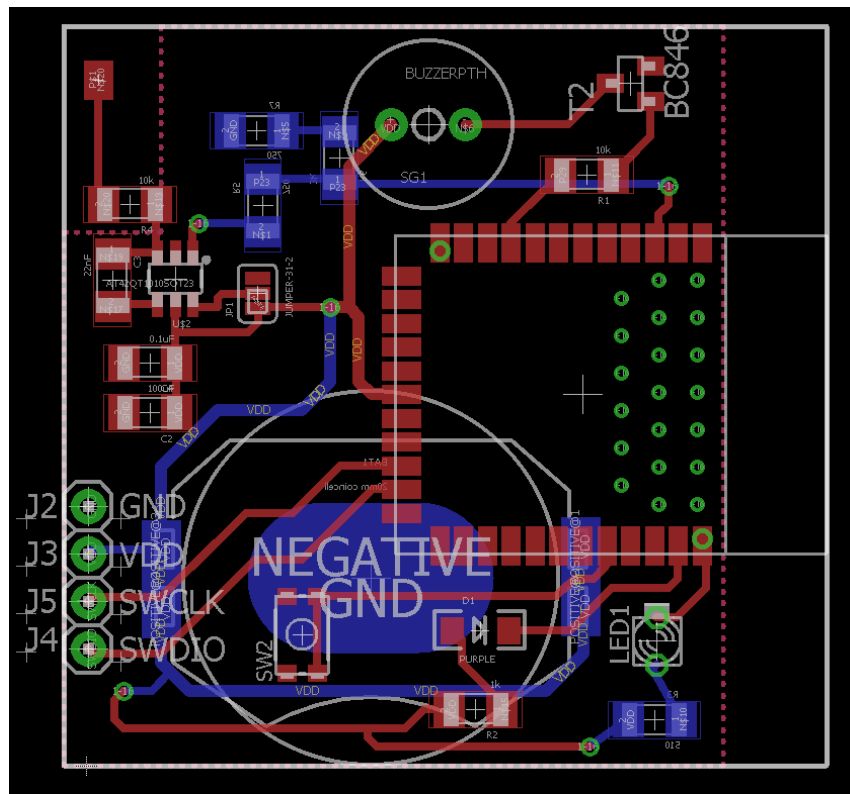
PCB layout for final revision of smart medication cap prototype using IMM-NRF52832 module.
